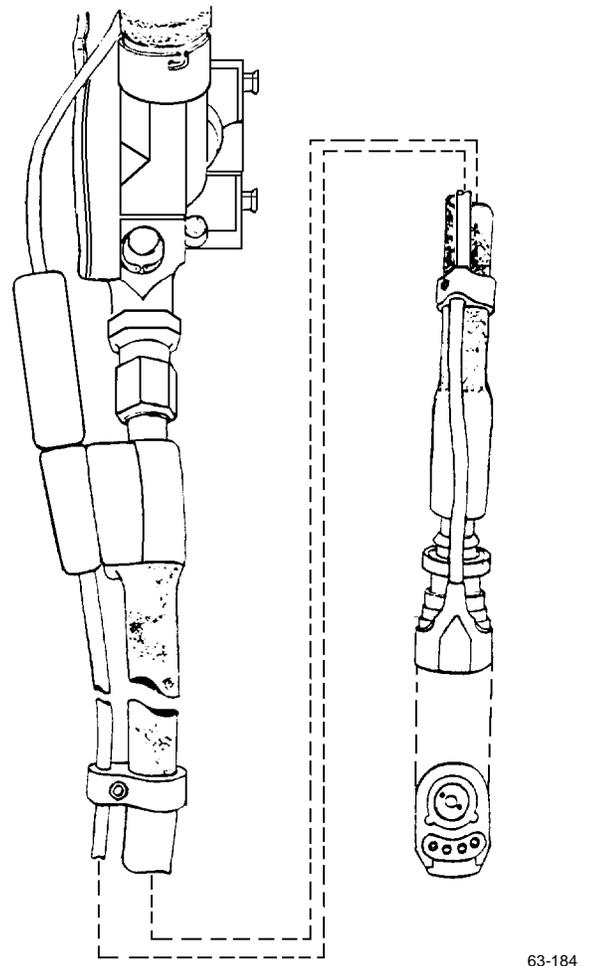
Oxygen Regulator Hose Assembly (Typical. Used for OBOGS Only)
